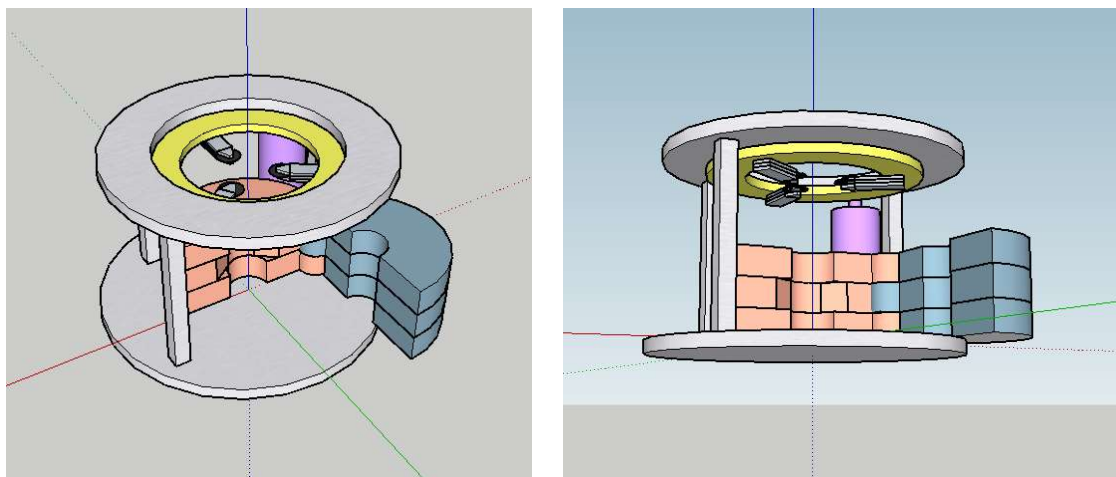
Design of capsule opening device, top perspective with tabs open, bottom perspective with tabs open.
